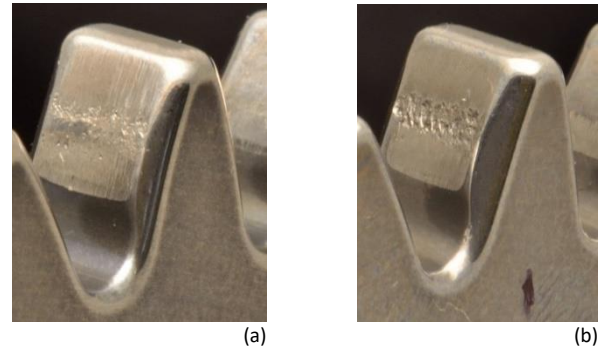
Typical pitting for (a) mild and (b) moderate severities of damage.
